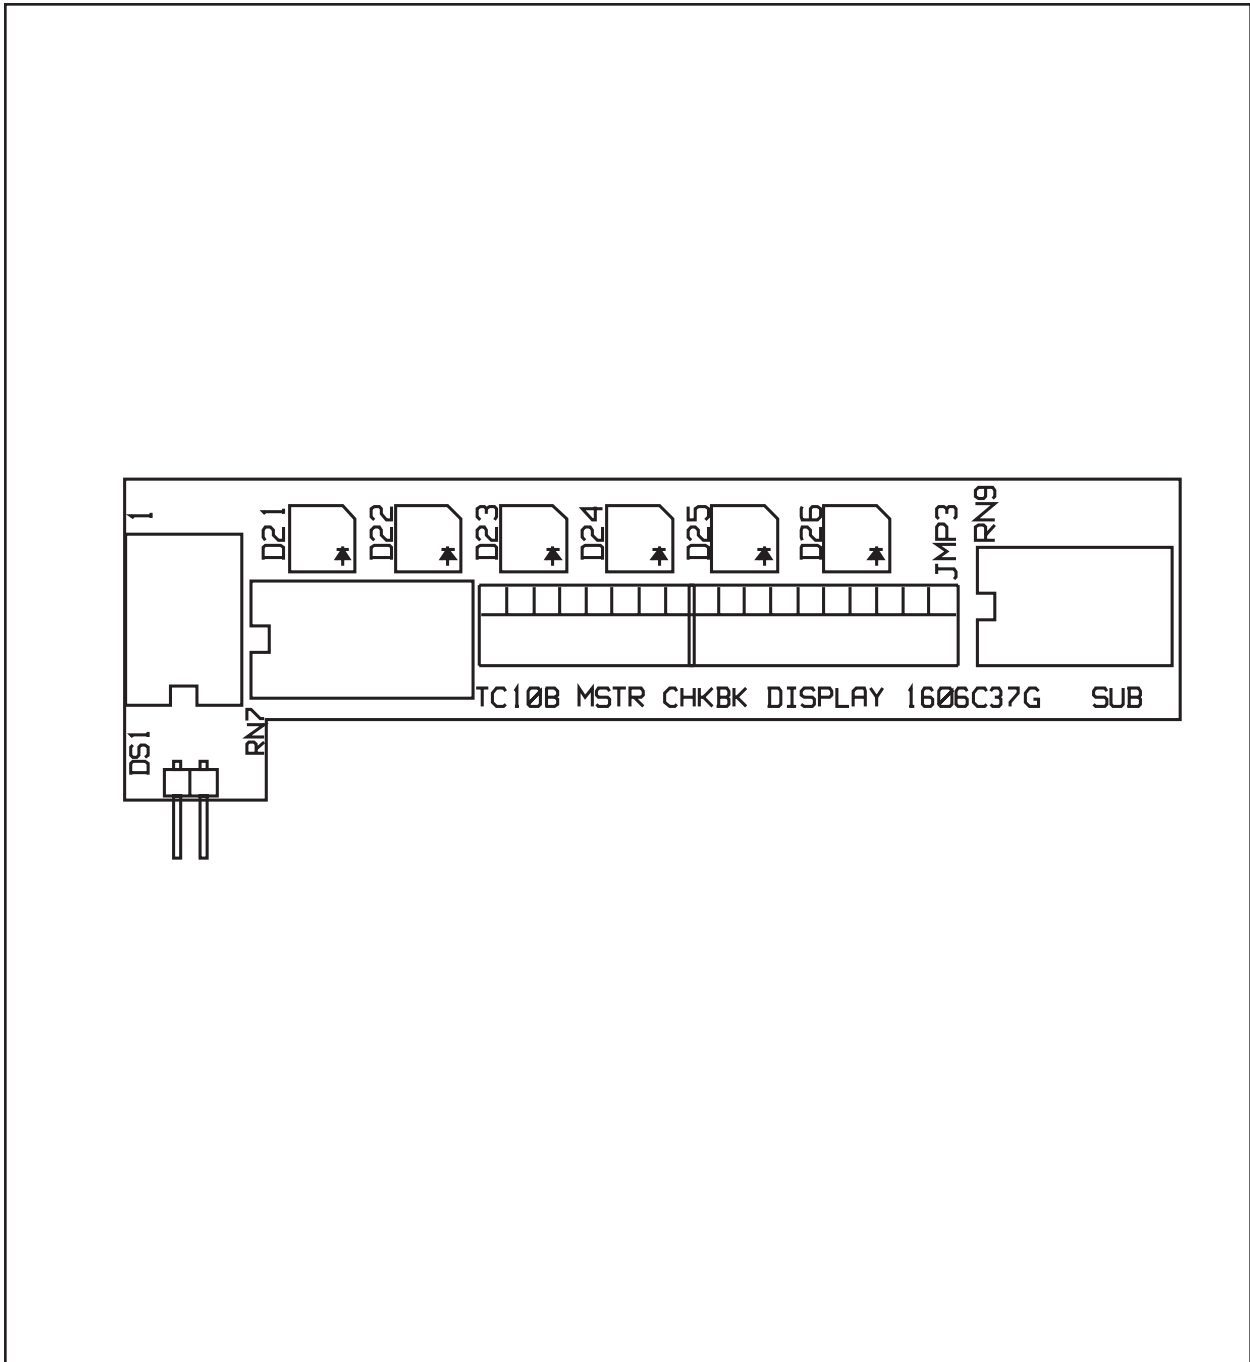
Automatic Checkback PC Boards — Master Display Sub Board. (9648A08)
